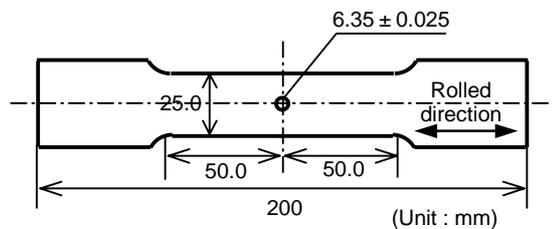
Notched coupon specimen (Thickness: 6mm)
